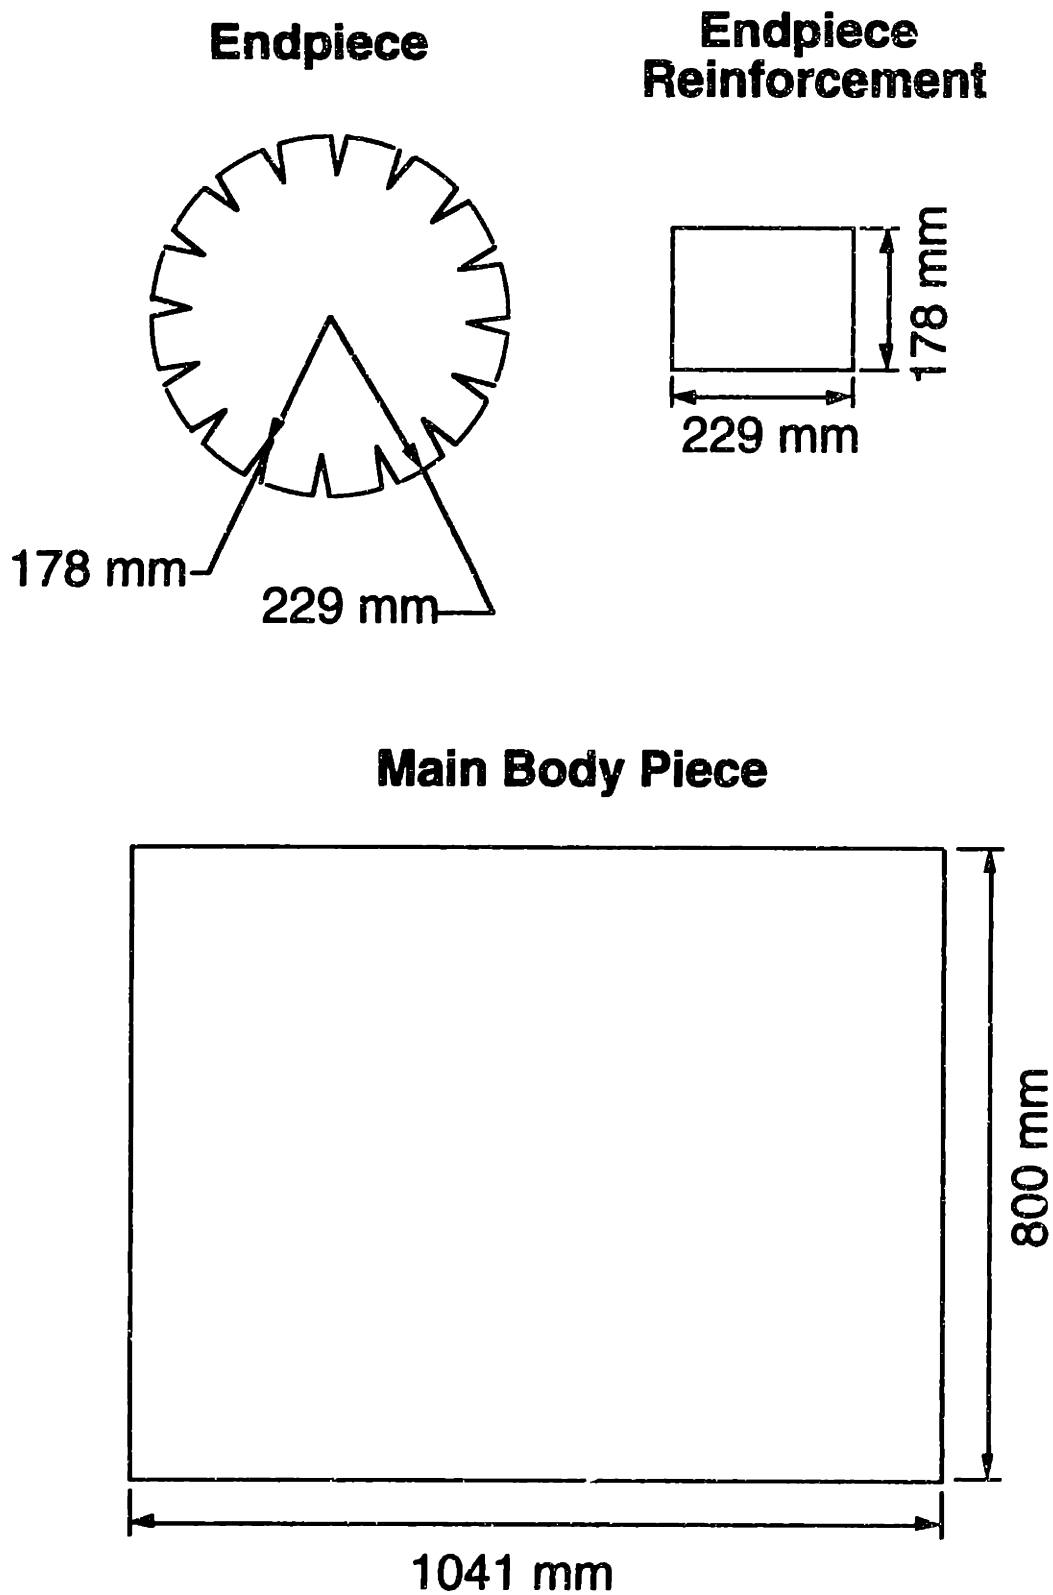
Illustrations of rubber pieces for cylinder bladder.
